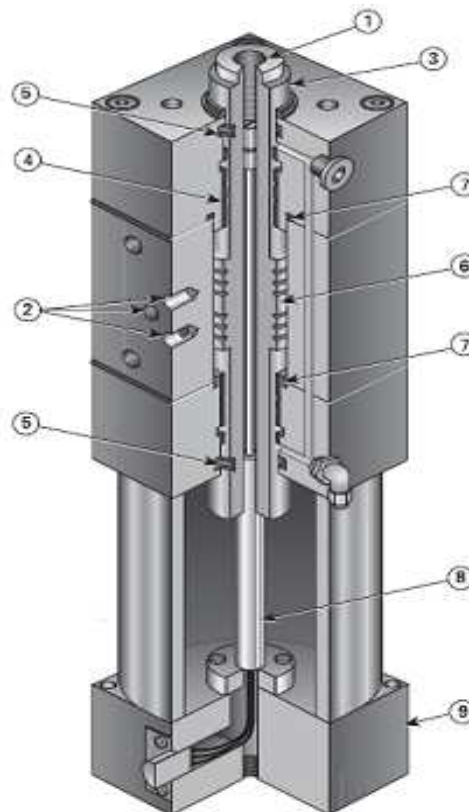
Constructive configuration for a MTS 242.25 linear hydraulic actuator [21]
